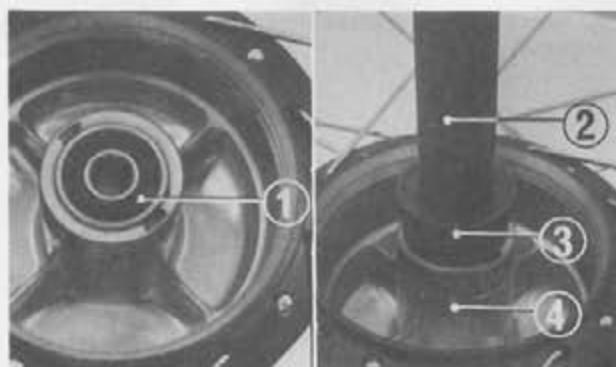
(1) Ball bearing (2) Driver handle (3) Driver attachment (4) Wheel hub
